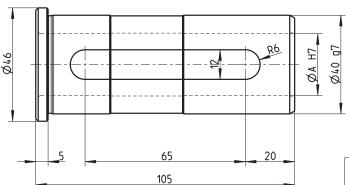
Tool holder for boring bars up to ø40 mm for radially mounted dynamometer with reducing bushings ø40/32 mm, ø40/25 mm, Type 9129AF40
